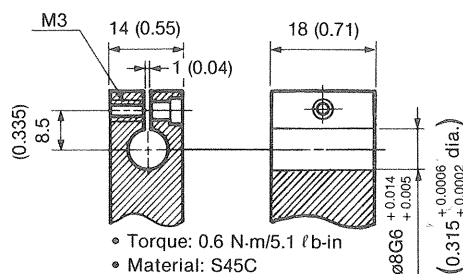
Dimensions and Tolerance of Probe Holder (Example)
